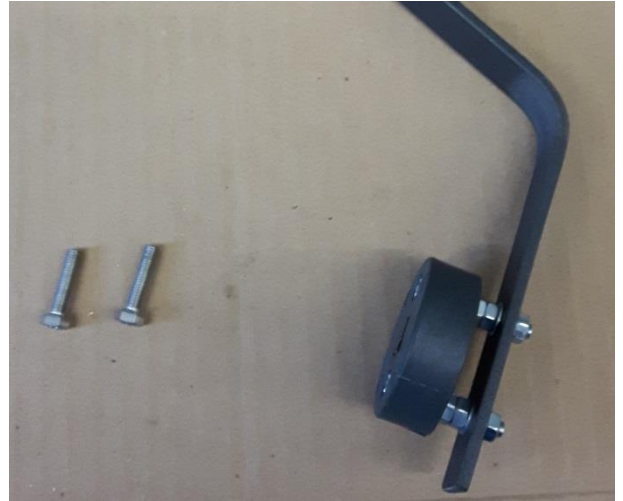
WHEEL ANGLE SENSOR DISC MOUNTED WITH SPACERS.
